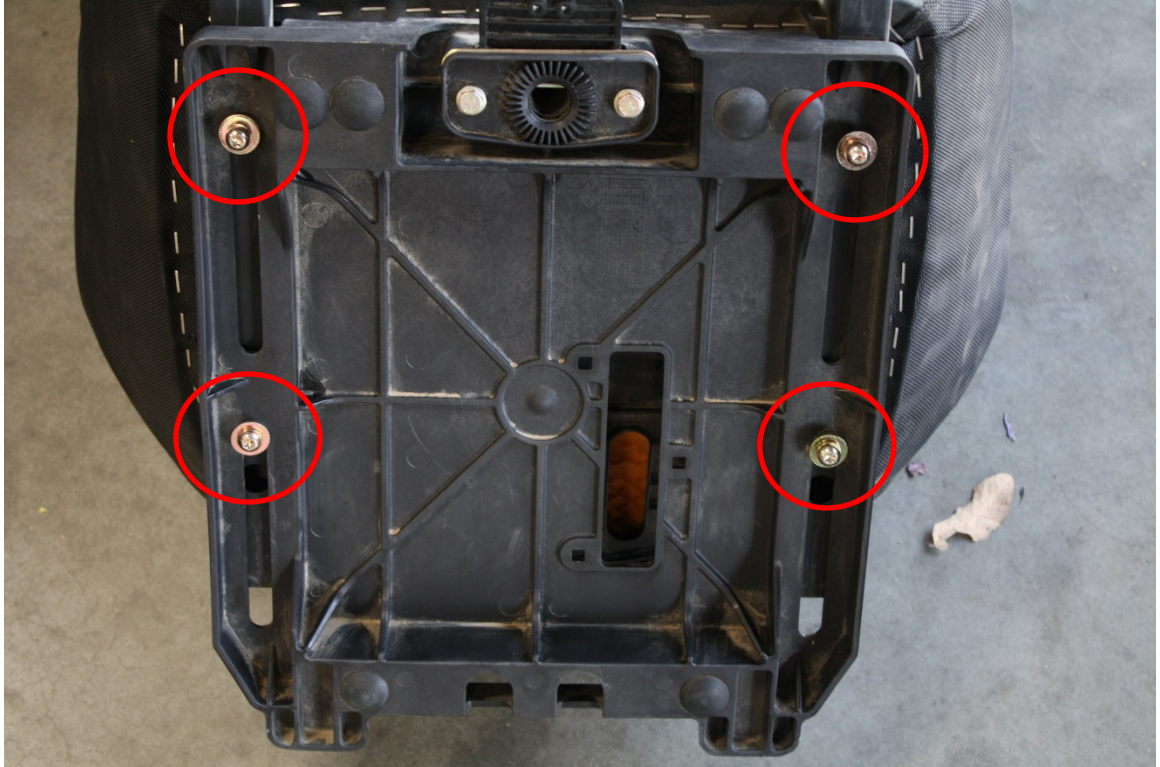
(If new base plates have been purchased these don't need to be removed.) Shows the four bolts that must be removed - before removal, take note of where the bolts are placed by taking measurement or by marking the base plate with a permanent marker.
